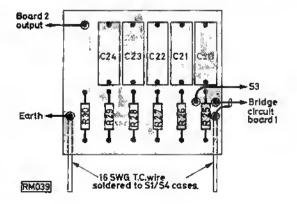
Component placement drawing for the Bridge Circuit p.c.b. (Board 1)
